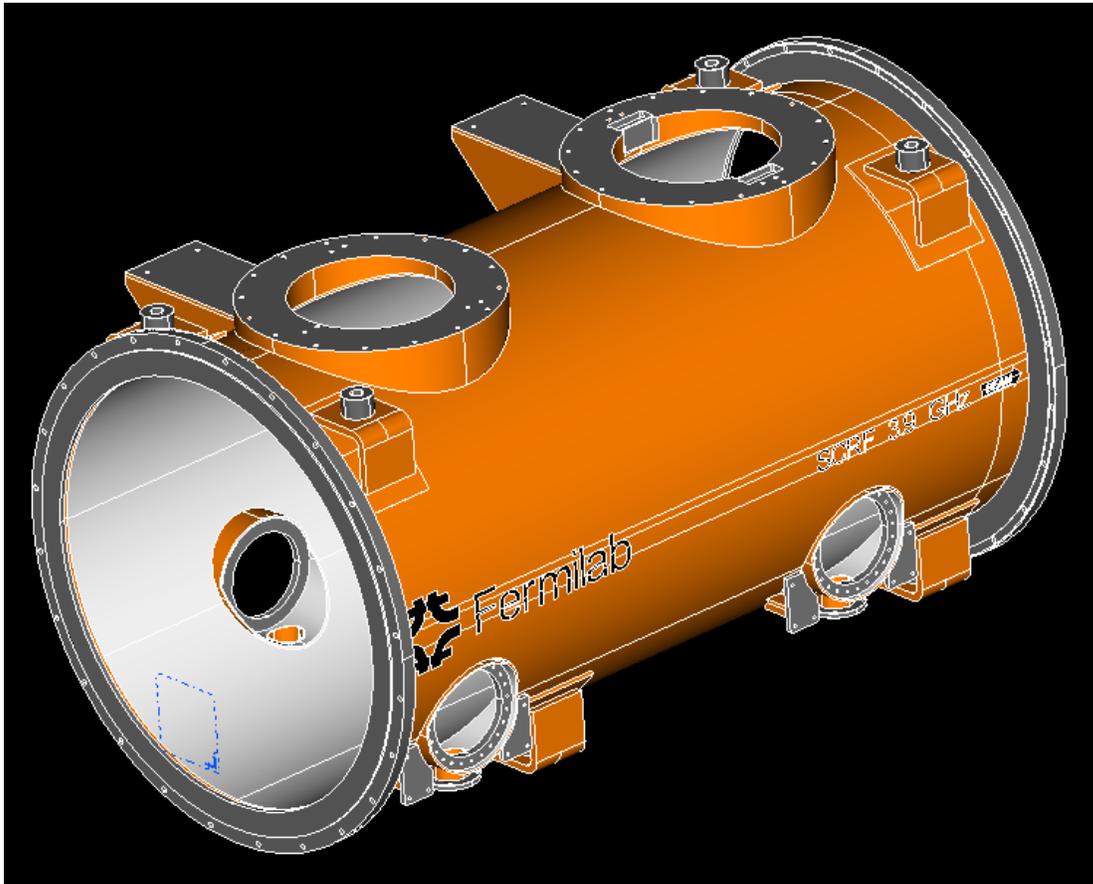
An overall view of the vacuum vessel weldment of 3.9 GHz, 3rd Harmonic
